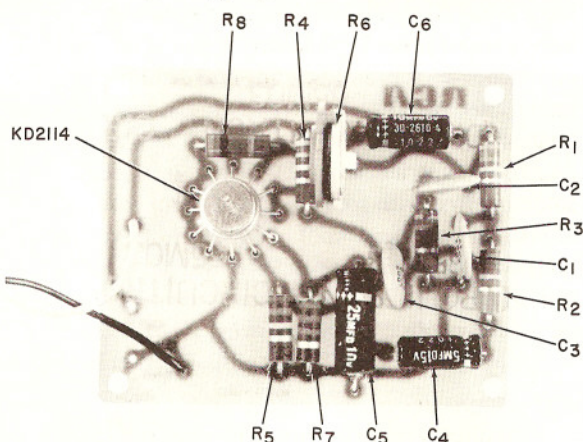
Photograph of the KC-4002 audio oscillator showing the component layout.
